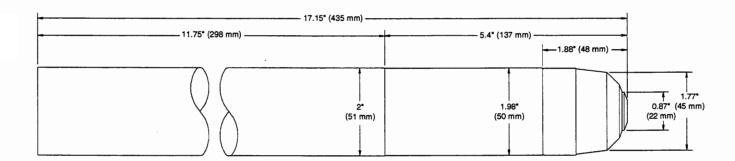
PAC620 Standard Torch Assembly with Dimensions
